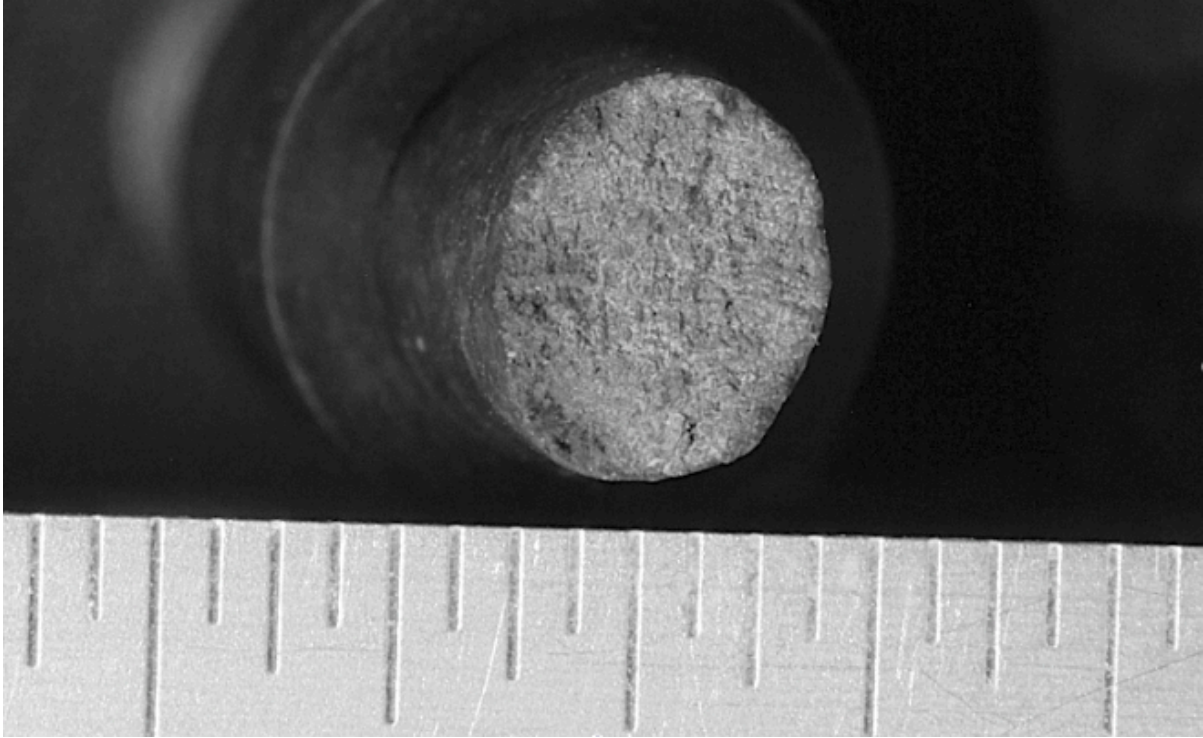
Macro-photographic image of the fracture surface of the specimen S5 (set 821) halve demonstrated on the right-hand side in figure 38.
